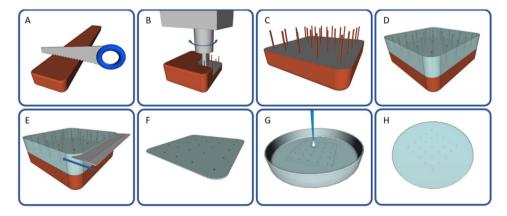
Manufacture of RMPs using CNC milling and cryo-microtomy. (A) An injection molded polymer block is cut into square pieces. (B-C) The cut pieces are processed using a CNC mill and a polymer column plate is created. (D) The polymer column plate is embedded in gelatin. (E-F) the embedded column plate is cut into slices using a cryo-microtome. (G-H) The slices are further covered with a thin film of gelatin from both sides to facilitate handling and ensure no RMPs are lost during handling
